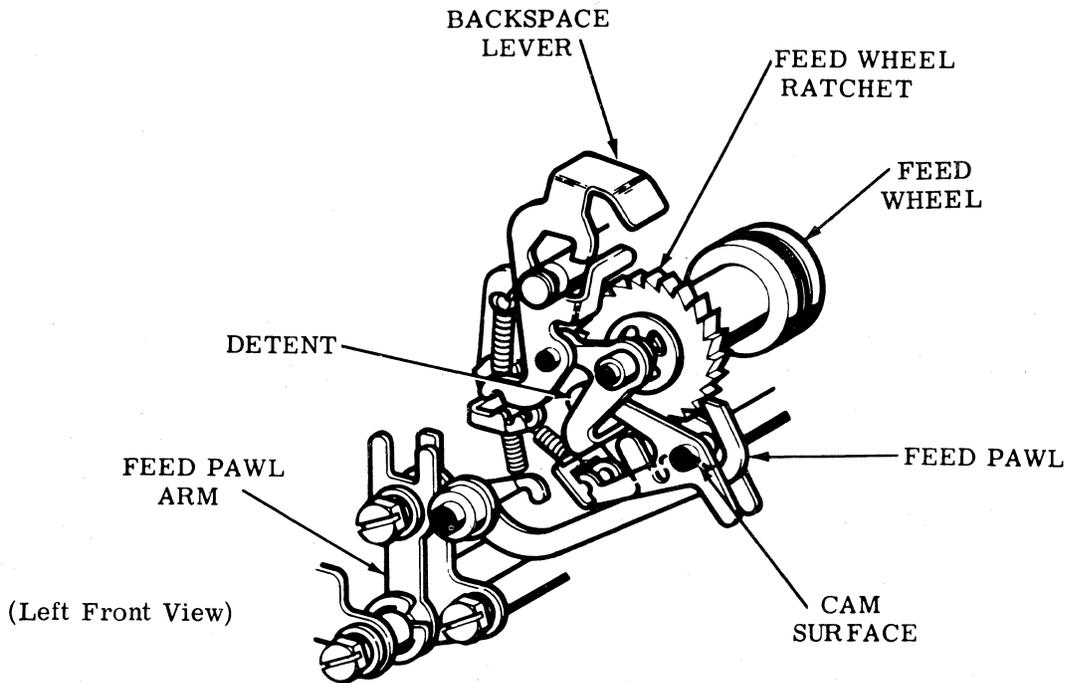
Feed Wheel Mechanism (Tape Feed Mechanism)
